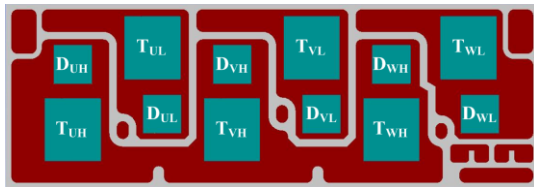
Internal layout of the molded IGBT module shown in Fig. 1.
